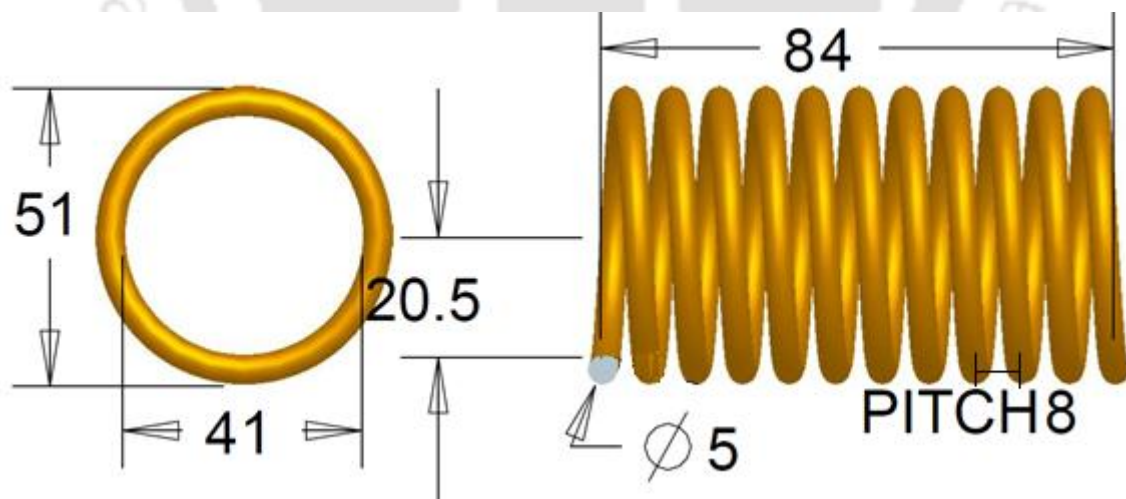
Detail dimensions of the multi-turn solenoid coil used in the experiment
